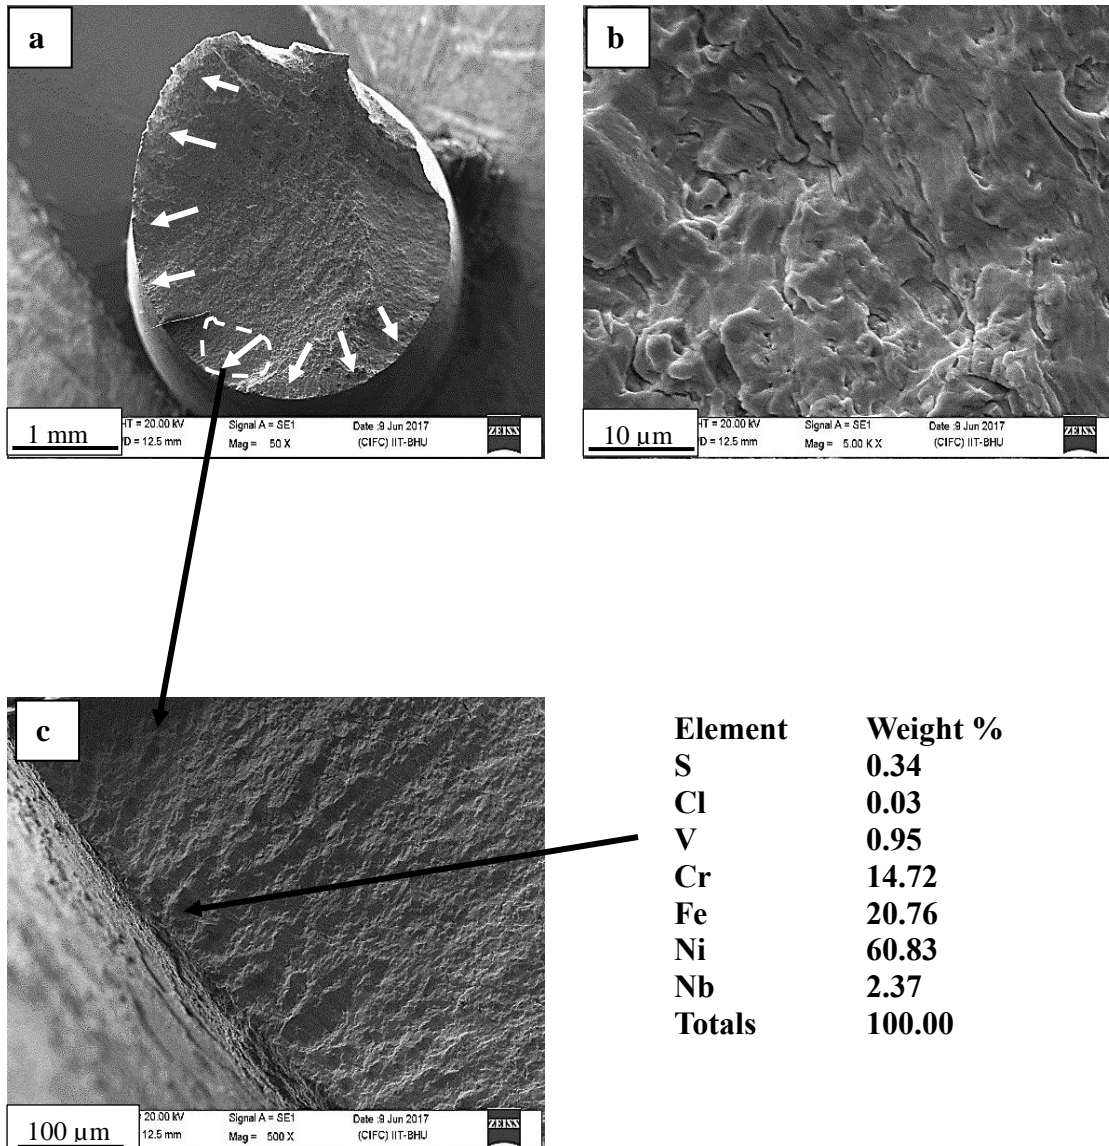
11: Fractographs of the fatigue sample pre-corroded and fractured from HCF at the stress amplitude of ± 750 MPa at 600°C in air showing: (a) fracture surface and crack initiation sites, (b) fatigue striations, and (c) EDS analysis close to the crack initiation site.
